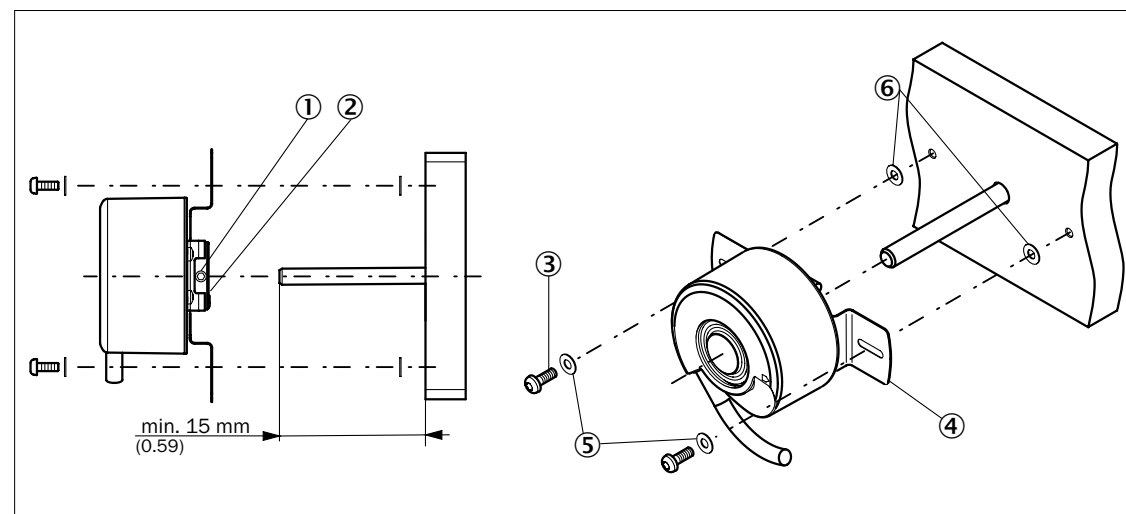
Mounting through hollow shaft with stator coupling 0, B, D, E, G (clamping at the rear)
